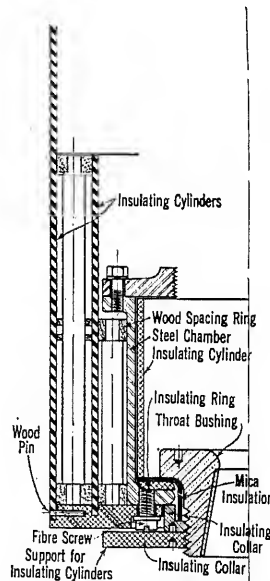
EXPLOSION CHAMBER ASSEMBLY AS REDESIGNED FOR TESTS 36 TO 65 (MAY 23, 1926)
